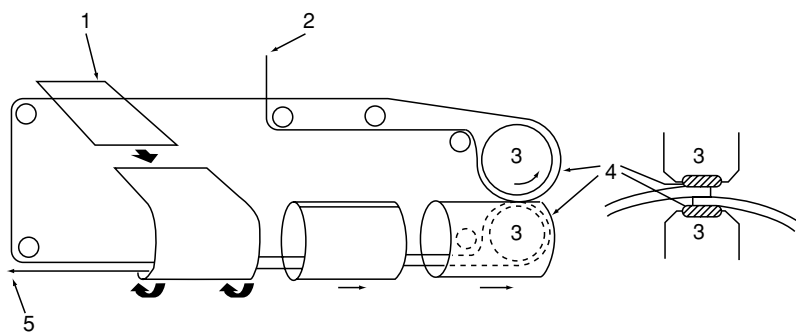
Welding side seam of a three-piece can: 1, blank feed; 2, wire fed; 3, welding rolls (electrodes); 4, copper wire (welding contact); 5, used wire. From Bakker M and Eckroth D (1986) *The Wiley Encyclopedia of Packaging Technology*. New York: John Wiley, with permission.
